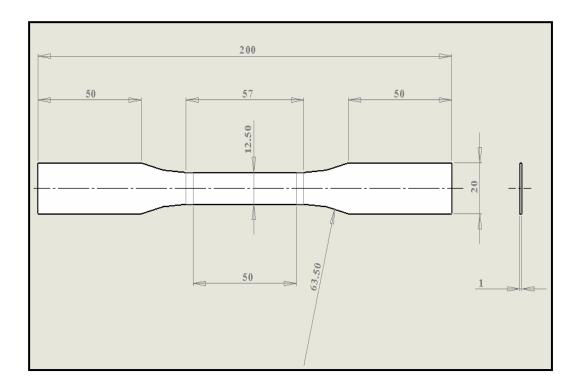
Top view of rectangular tensile test specimen. Dimension in millimeter (mm). Modeling by SolidWorks Software
